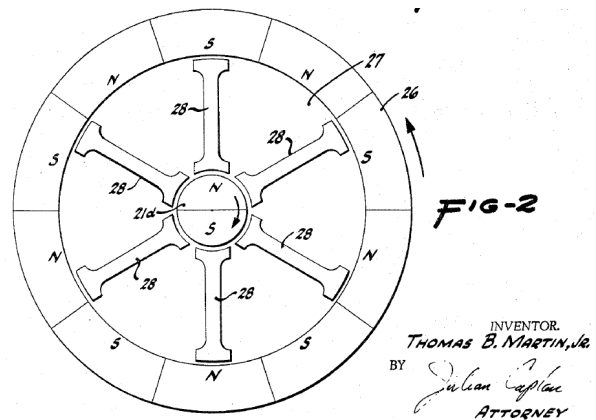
Coaxial Magnetic Gear (Shutter-Type) (8)
